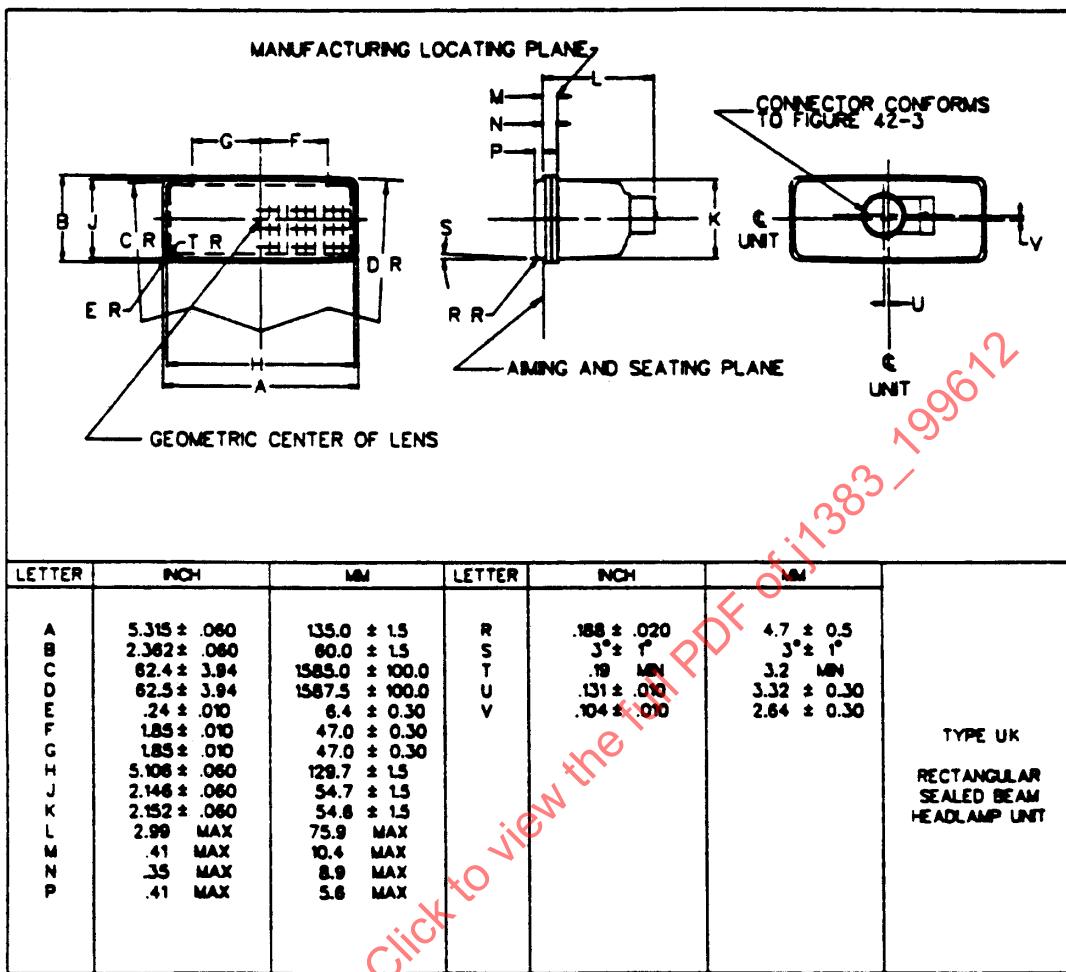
TYPE UK RECTANGULAR SEALED BEAM HEADLAMP UNIT
